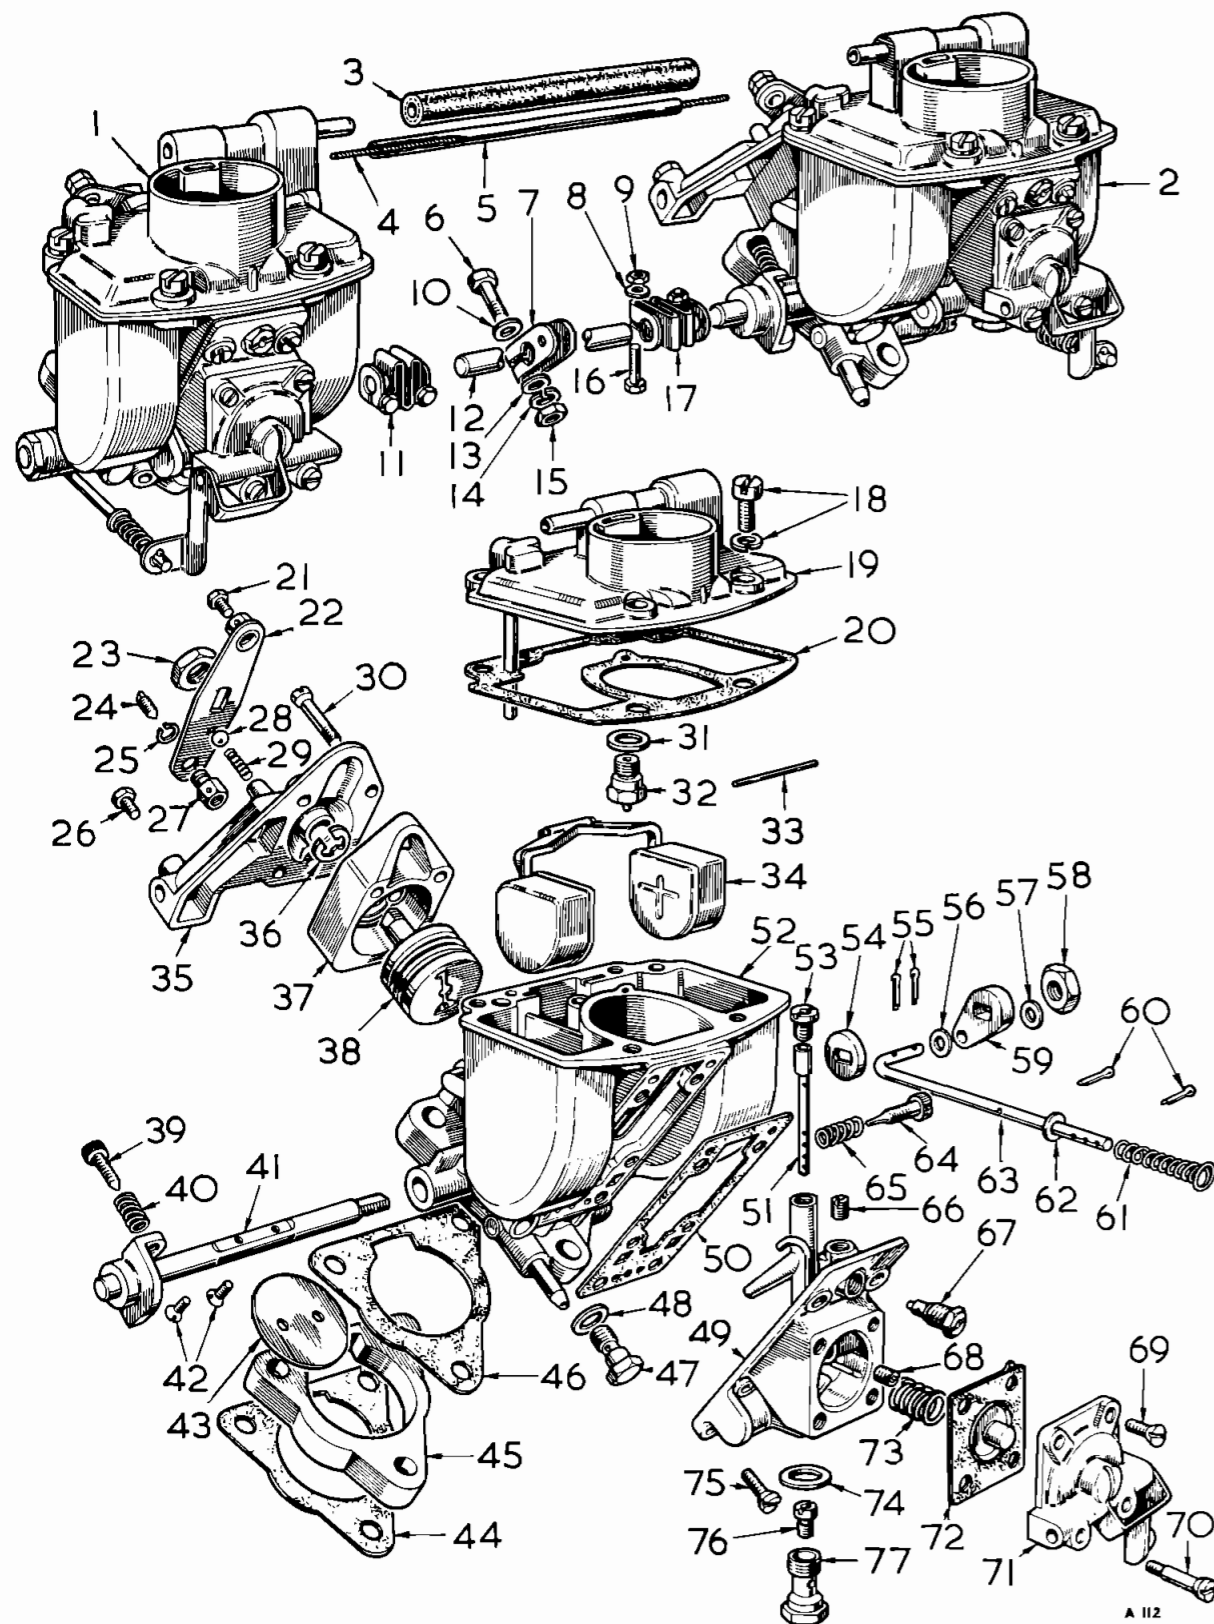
Exploded B32 P1H semi-downdraught carburettor
